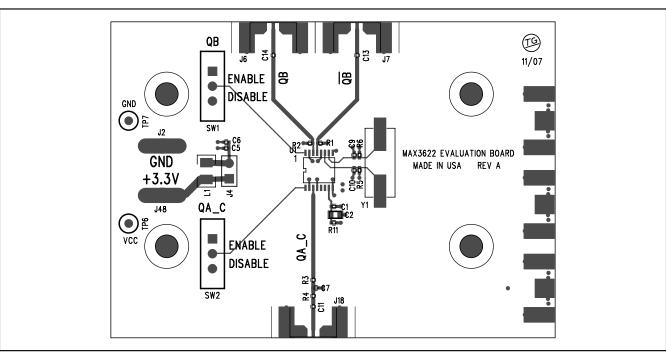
MAX3622 EV Kit Assembly Drawing—Top Side
